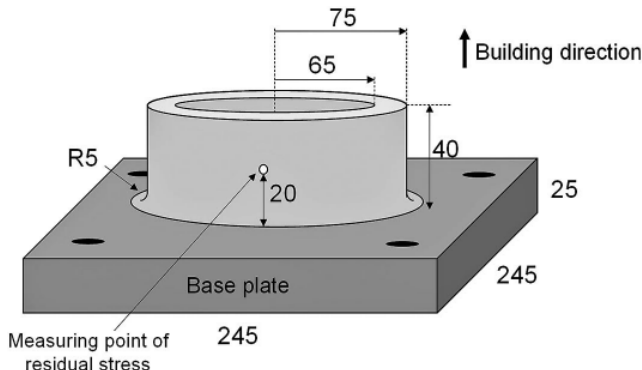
Schematic drawing of hollow cylindrical part used in this study. Unit: mm.
